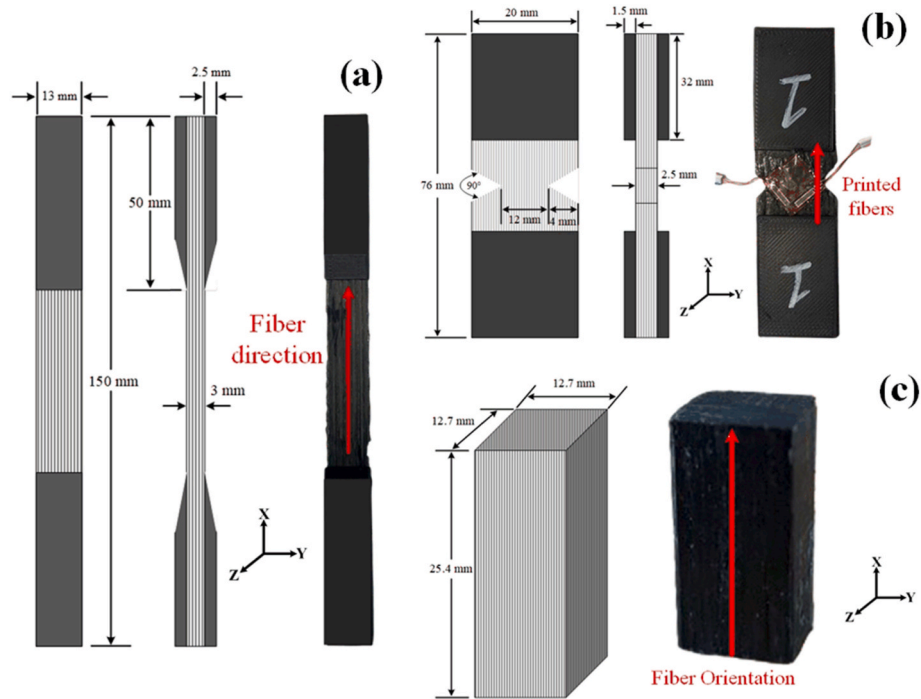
CCFRTC specimens fabricated using FFF with dimensions for (a) tensile test, (b) shear test, (c) compression test.
